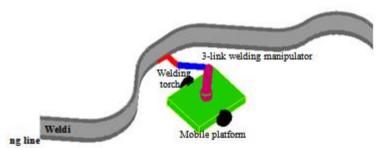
Three-link welding manipulator mounted on mobile platform
